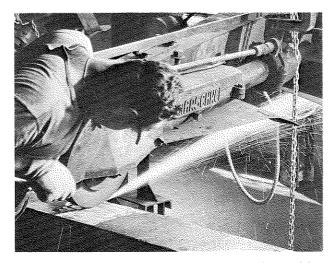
Operator Conditioning a Surface with a Swing-frame Grinder.
